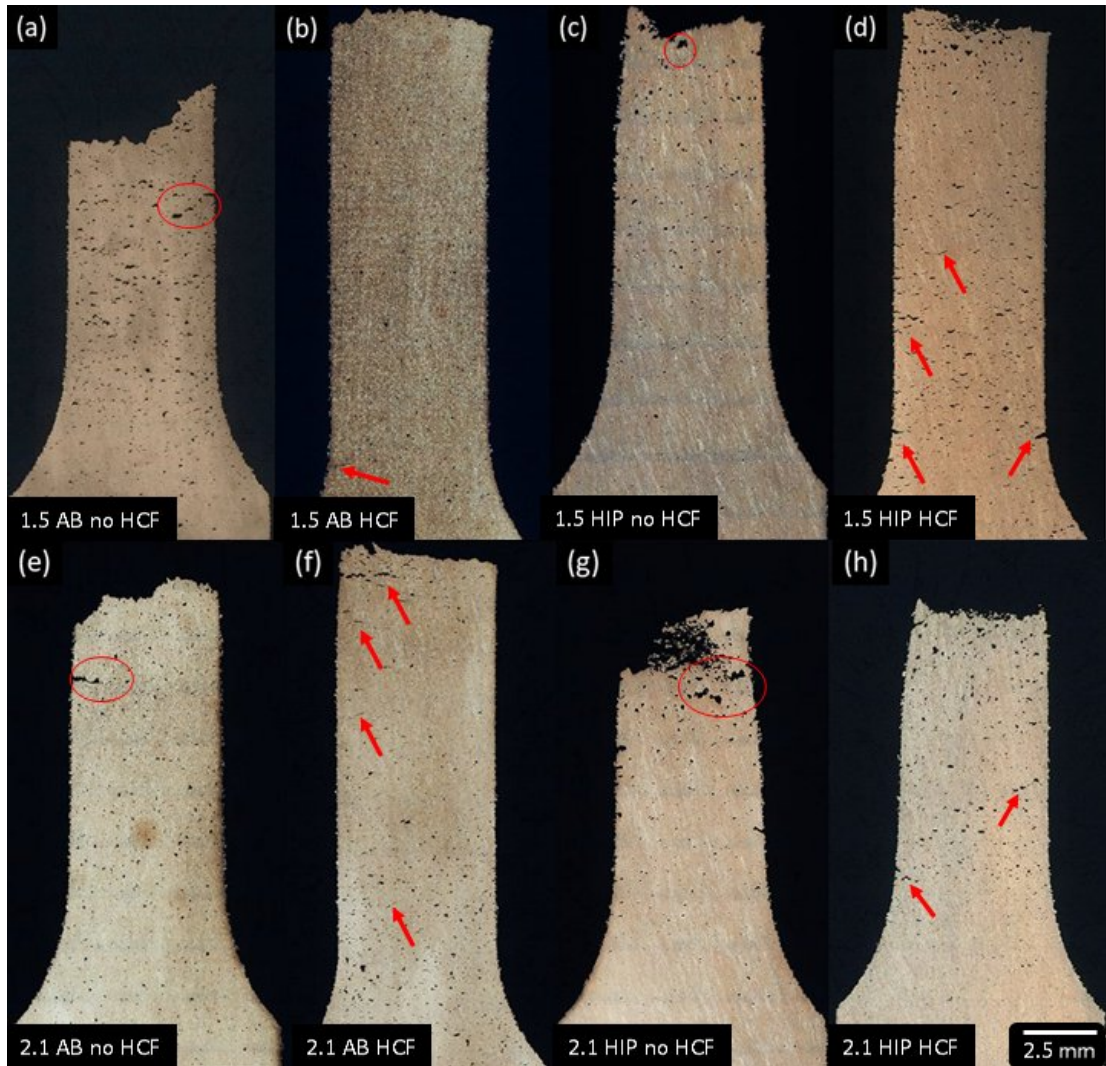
Fractured specimens perpendicular to the fracture plane shown (a), (b), (c), and (d) for 1.5mm specimens and (d), (f), (g), and (h) for 2.1mm specimens. Parts (a) and (e) show as-built specimens with no HCF, parts (b) and (f) displays as-built specimens + HCF, parts (c) and (g) displays HIP'd specimens with no HCF, and parts (d) and (h) show HIP'd specimens + HCF. Red circles are used highlight pore growth and coalescing, and red arrows point to secondary cracks and/or pores coalescing.
